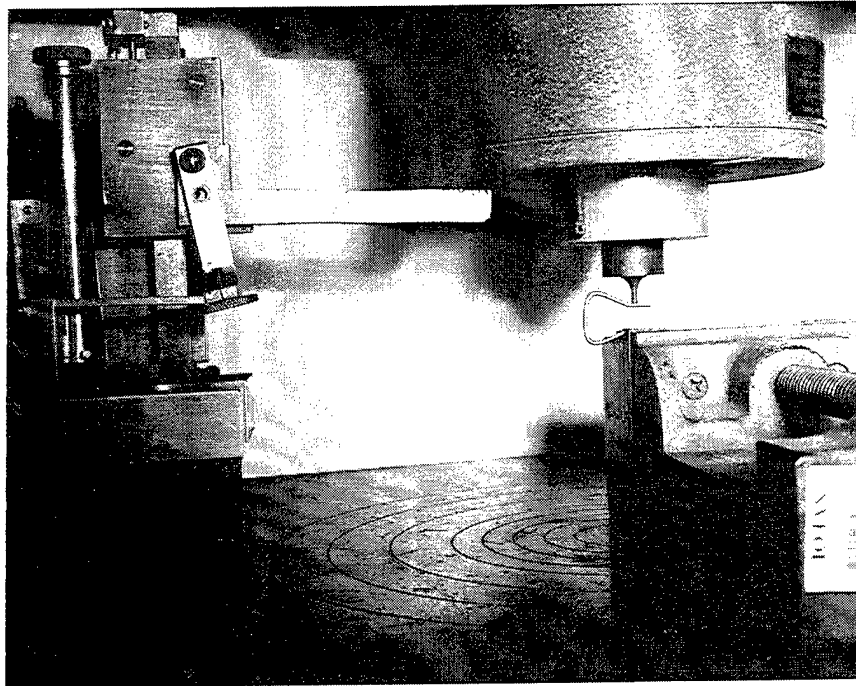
View of the spring compression test setup to determine the approximate spring rate in terms of pounds per inch. One end of a spring-B sample was clamped in the upper corner of the machine vise. A small plunger will push the free end closer to the clamped end when the load is applied in compression. A deflectometer on the left records the deflection of the free end during the test.
